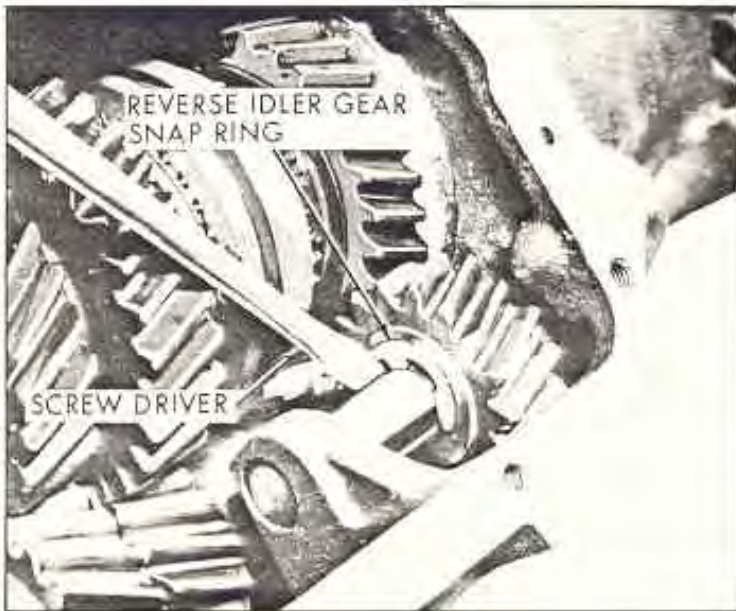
B-10 Removing Reverse Idler Gear Snap Ring
